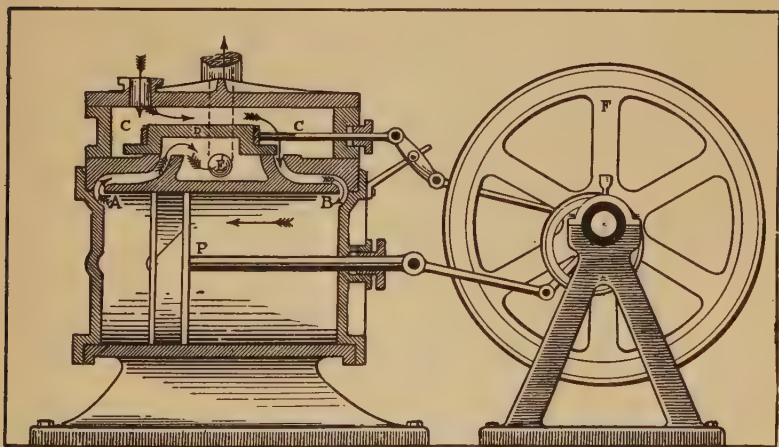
A diagram to show the parts of a steam engine. *A* and *B*, passages into the cylinder; *C*, the steam chest; *D*, sliding valve; *E*, exhaust pipe; *F*, fly wheel; *P*, piston.
